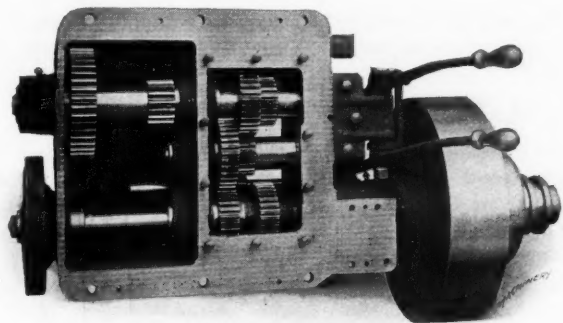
Gear-box Unit for Machine with Single Pulley Drive
